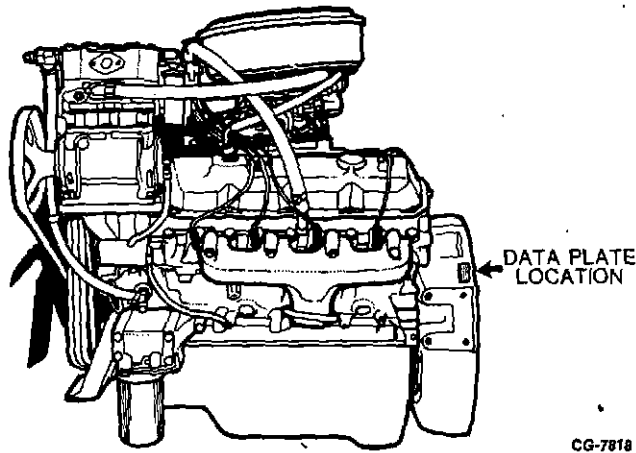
DATA PLATE IS ON LEFT SIDE OR TOP OF FLYWHEEL HOUSING
